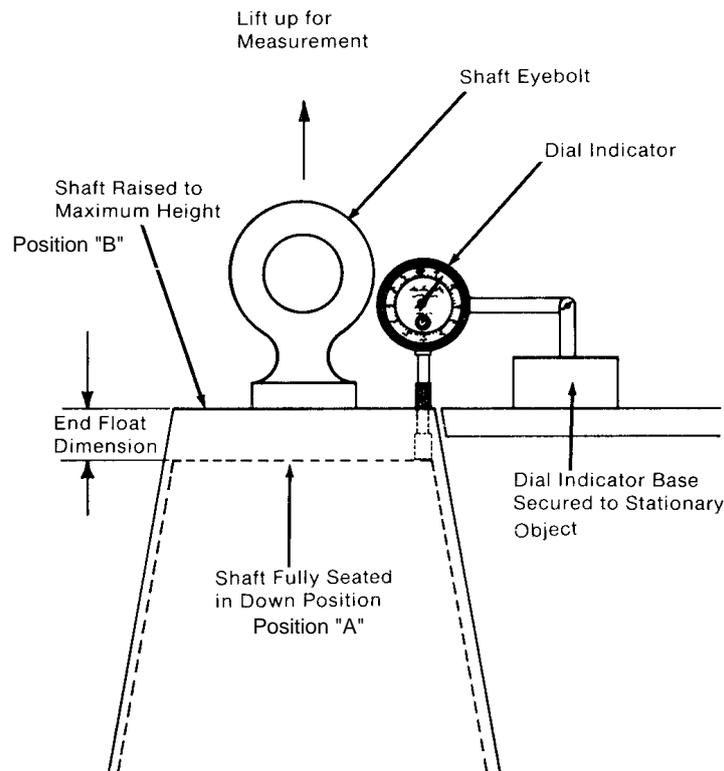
Dial indicator arrangement for checking shaft end float.
